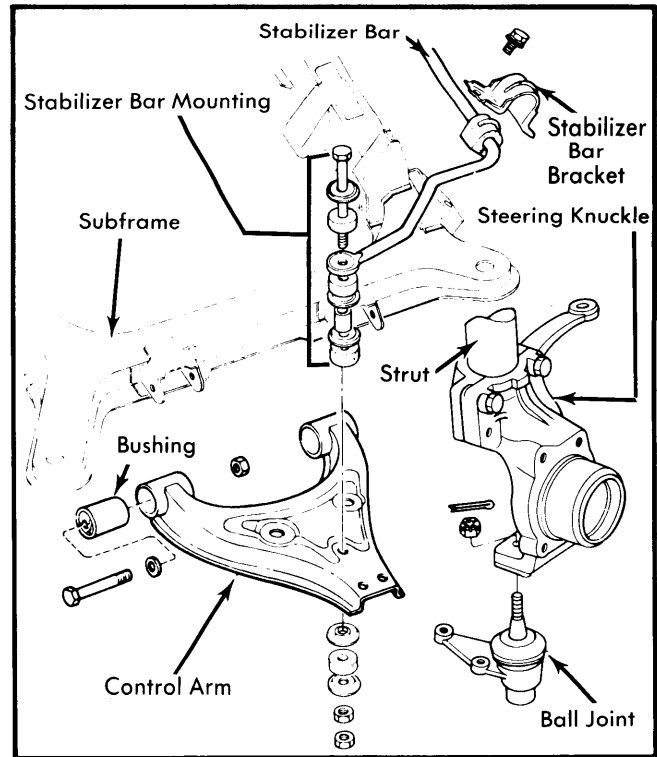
Exploded View of Control Arm and Stabilizer Bar
